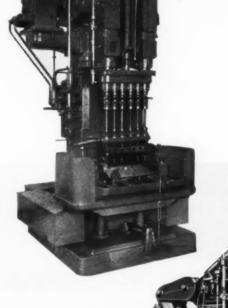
(Below, left)—Large honing machine with hydraulic reciprocation of hones; for diesel engine cylinders, etc.
